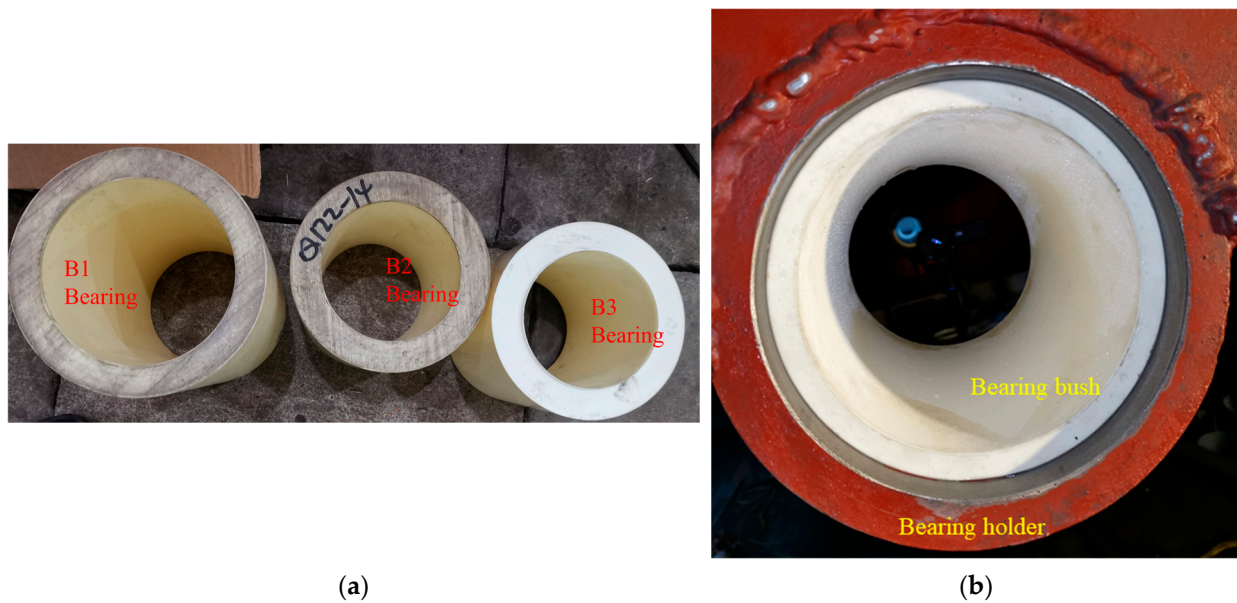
Thordon bearings. (a) Bearings without mounting; (b) chilled bearing.
